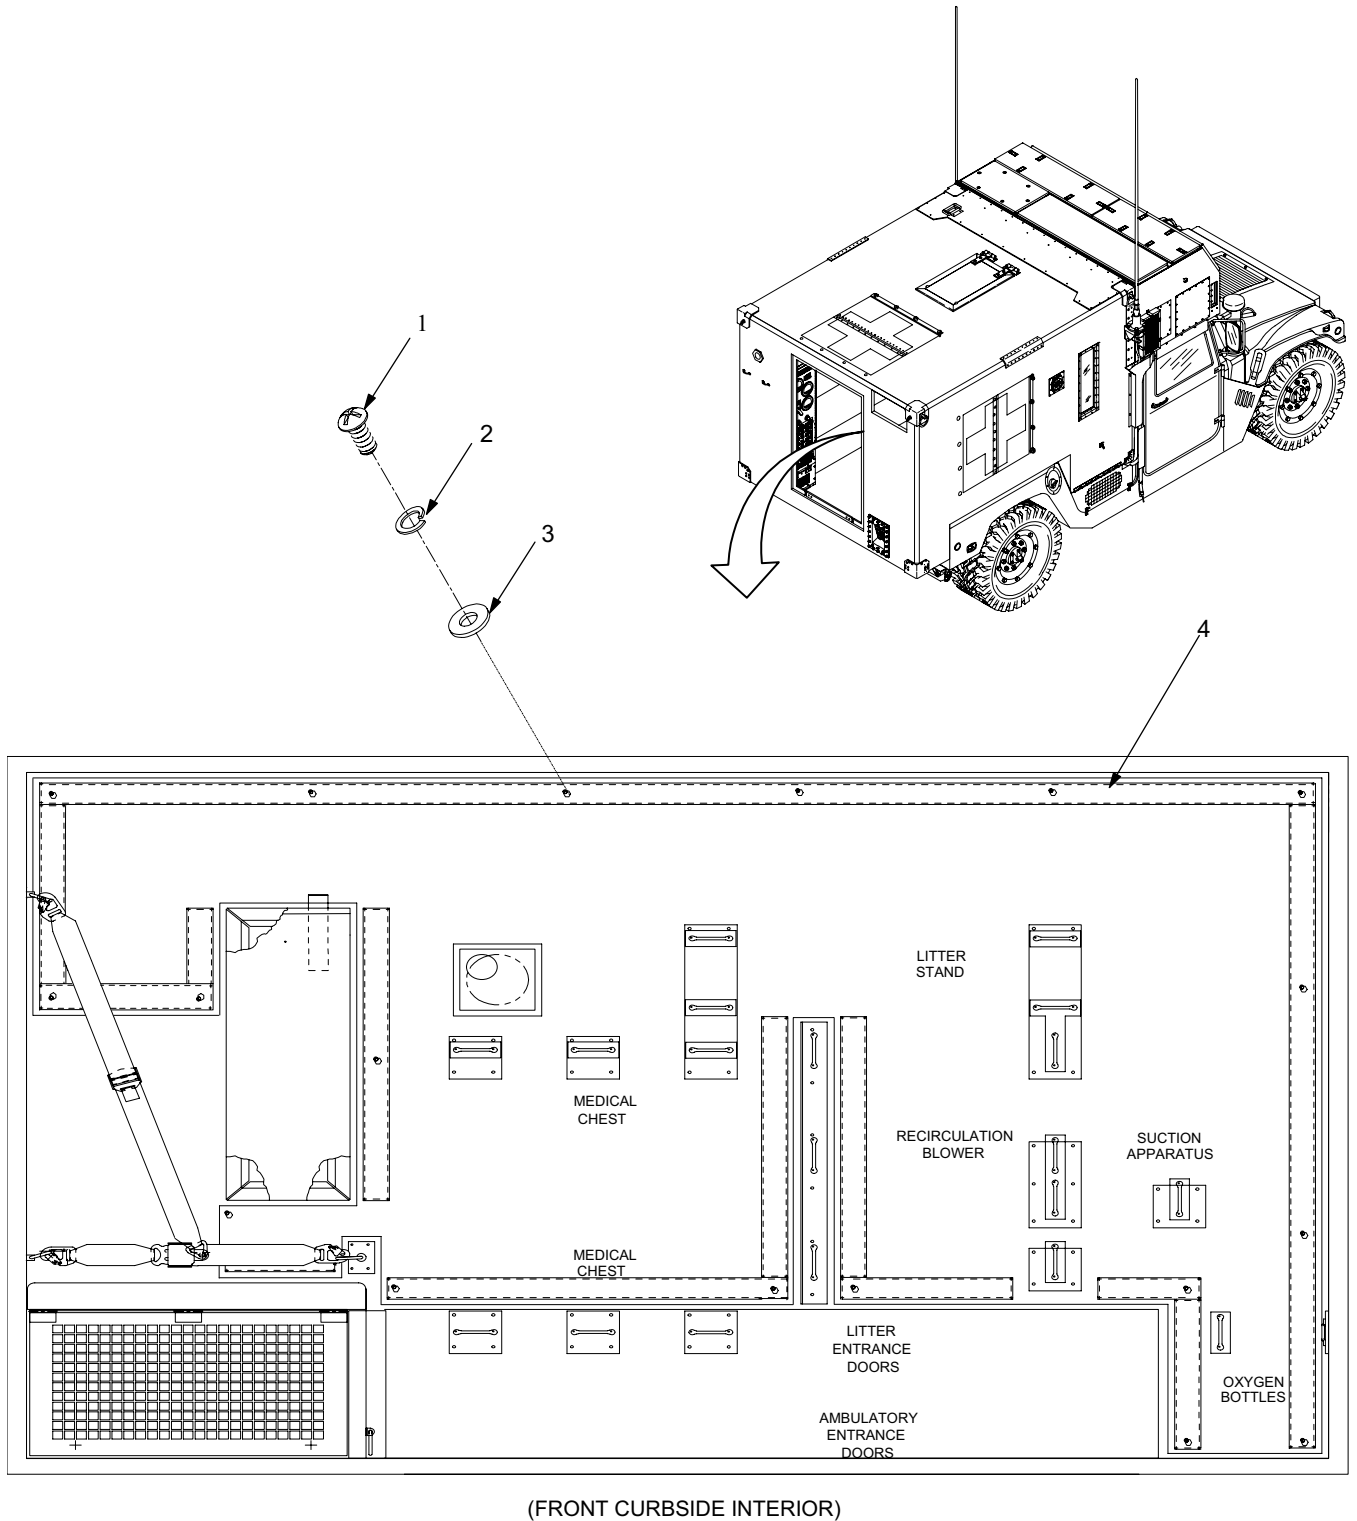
Sound Quilt Assembly Replacement (Sheet 3 of 6)
